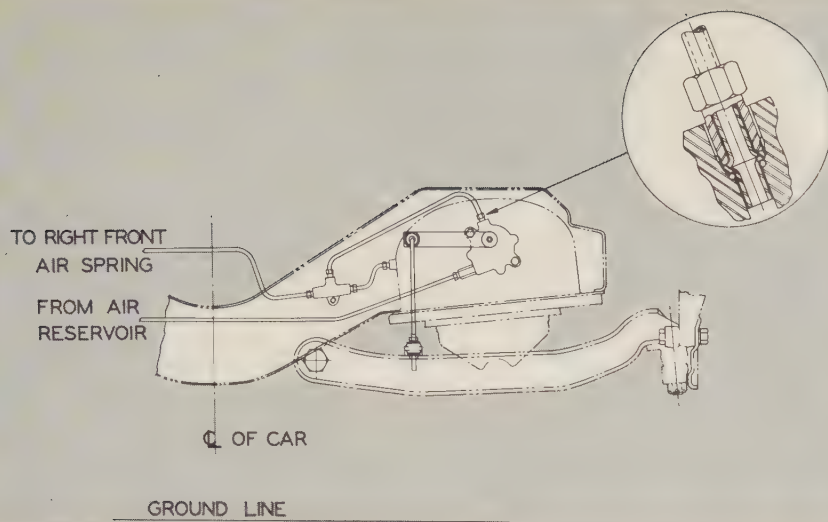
The arrangement of the leveling valve, control linkage, and air piping is shown in this head-on sectional view of a front air spring. The valve is mounted on the car frame with the actuating linkage connected to the lower control arm of the suspension. Changes in car height cause the valve to either admit or exhaust air, returning the car to normal height. The leveling valve has two tire-type air valves, one for intake and one for exhaust. A single leveling valve controls both front wheel air springs. A tee fitting in the air line connection between the two front springs incorporates a special check valve which permits a fast flow of air during leveling but restrains the flow (through a 0.012 in.-diameter orifice) during roll. Without this restrained flow, the car would have undesirable handling during roll conditions. A typical air line fitting is shown in the enlarged view. To make this connection, a shoulder is upset near the end of the air piping. At assembly, the threaded nut forces the shoulder down against the bottom of the tapped recess in the body of the fitting. This action compresses a rubber ring and assures a leak-free joint.
